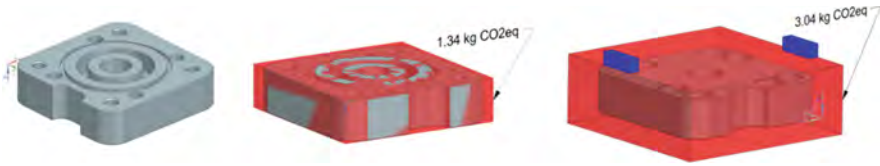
Top cover of the pneumatic cylinder assembly (left), CO₂eq of a minimum required aluminum block for the top cover without offset (middle) and with 5 mm offset and symbolic clamping attachments (right)
